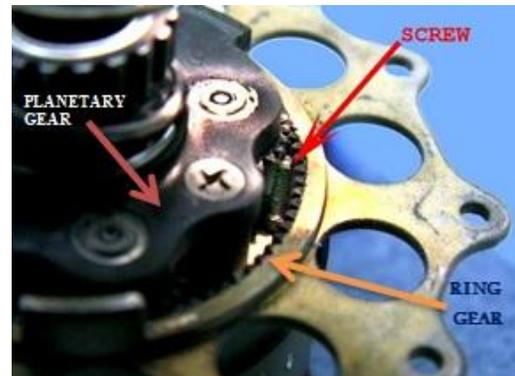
Screw lodged between planetary gear and ring gear. NASA Image
